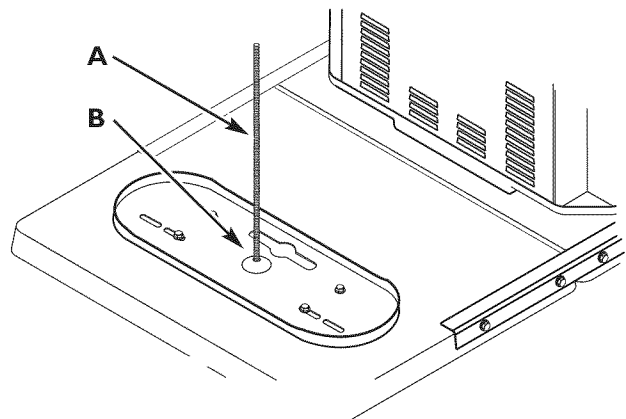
Attach Tank Hold-Down Rod to LP Tank Tray
